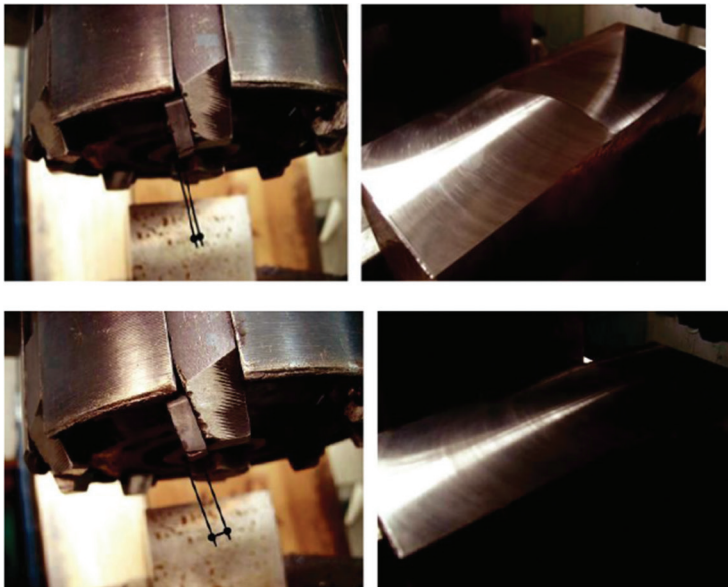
Wear on the back surface of the face mill tooth at the left and details with the processed flat surfaces on the right with a milling depth  $t = 1.0$  mm; to serve  $S_z = 0.125$  mm/tooth; cutting speed  $V = 392.6$  mm/min.
